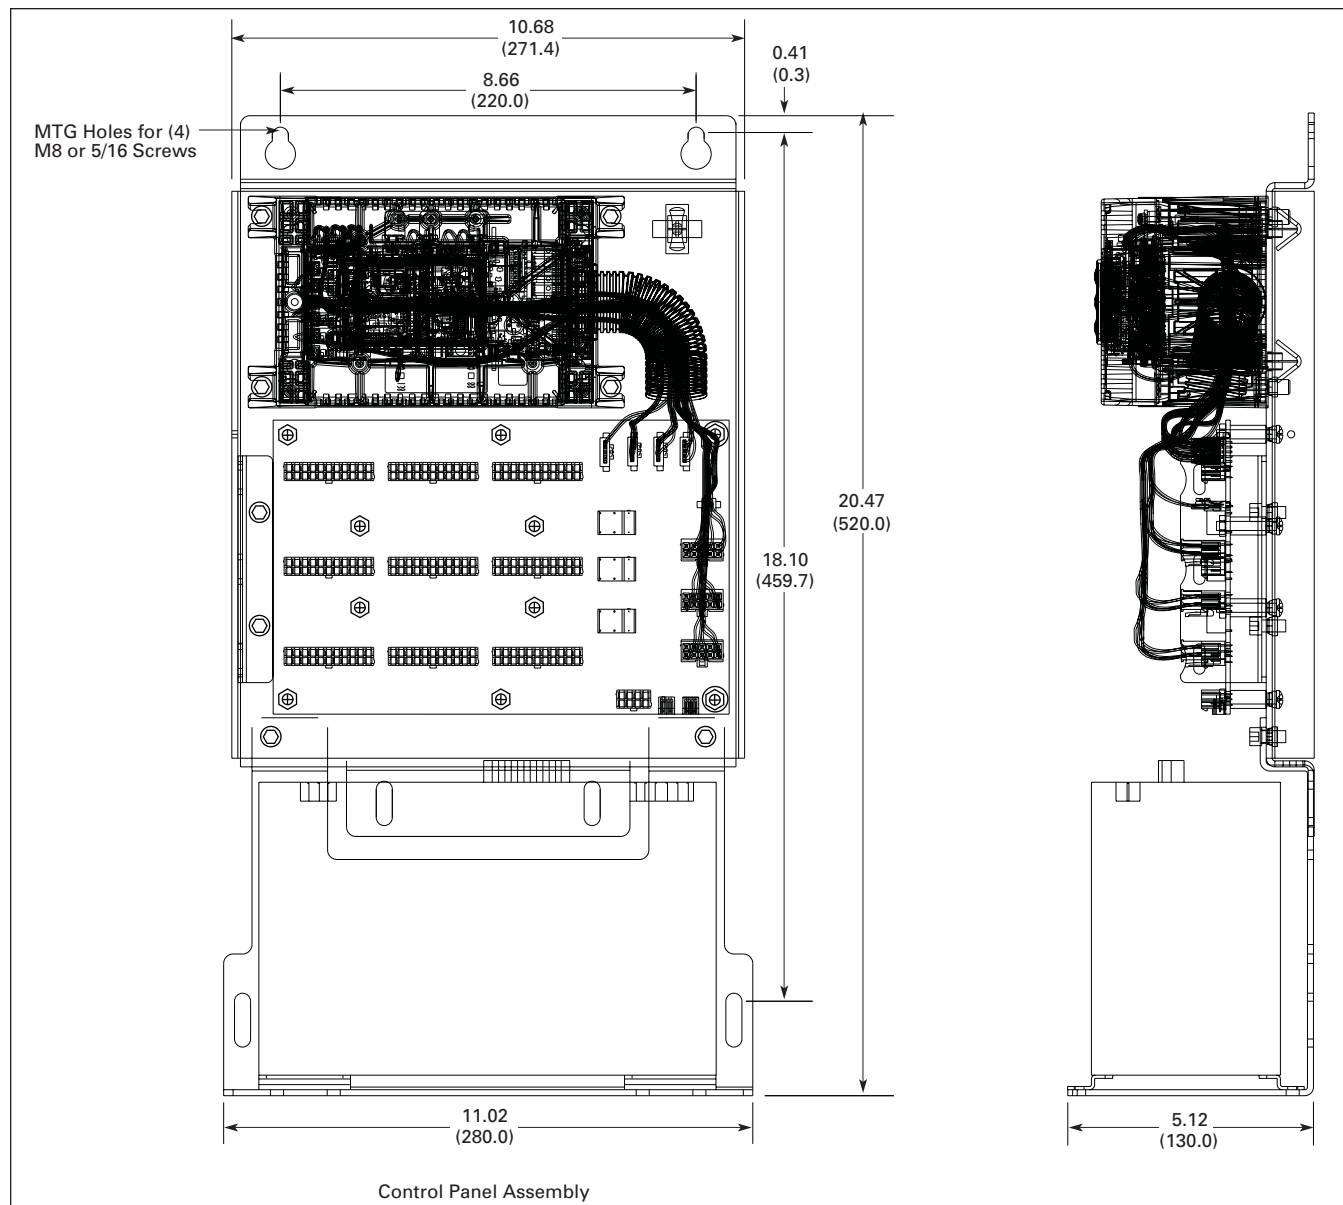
Control Module — Approximate Dimensions in Inches (mm)
